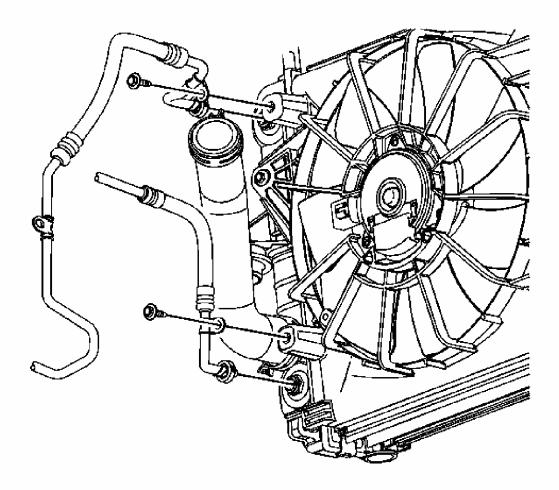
View Of Transmission Lines To Radiator Courtesy of GENERAL MOTORS CORP.
